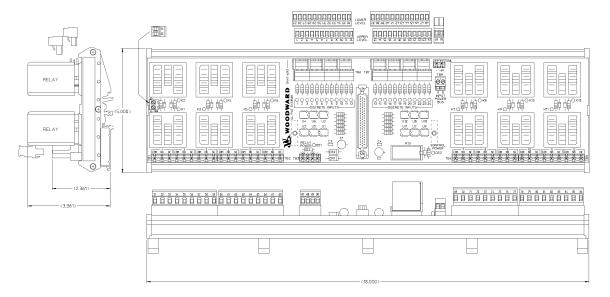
24/12 Discrete Module Outline Dimensions
